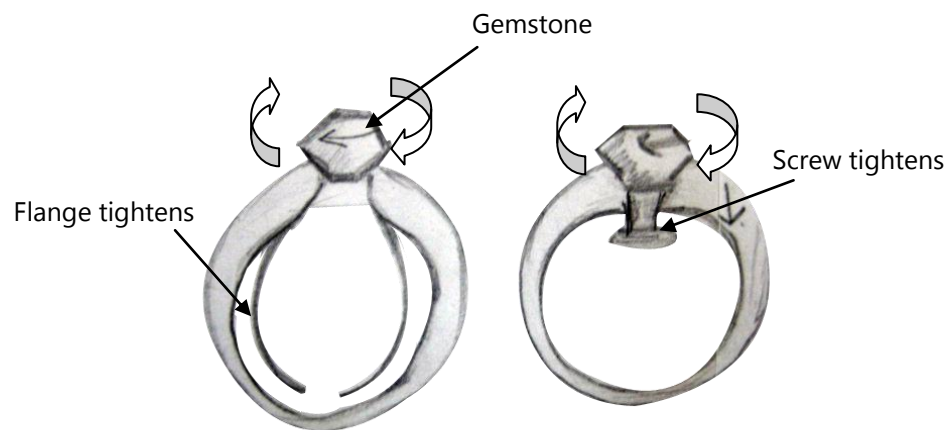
Mechanism to adjust the diameter of the ring using flanges (left) and screw (right)
